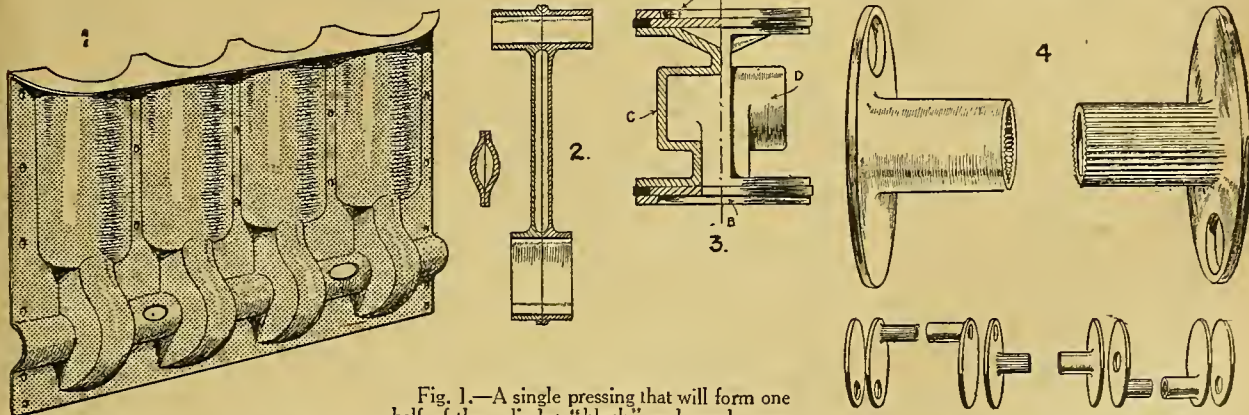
A single pressing that will form one half of the cylinder "block" and crank case.
